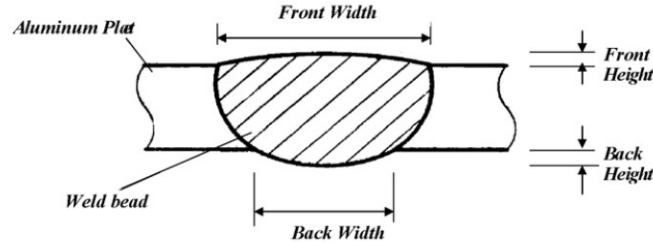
Schematic diagram of weld geometry measurements [1.113]
